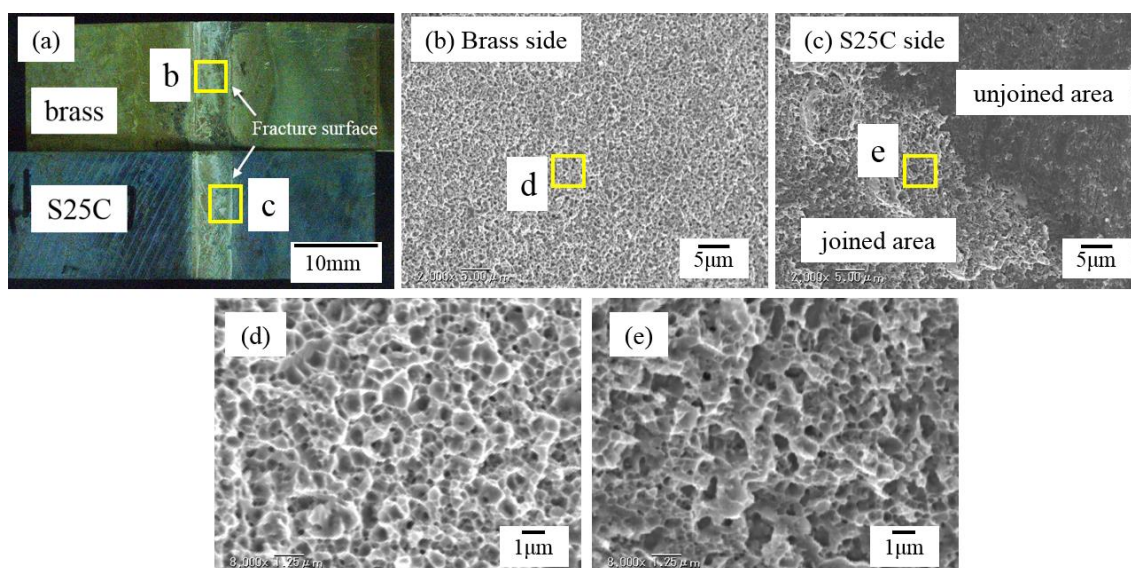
Matching fracture surfaces of the tensile test specimen of 64Brass /S25C lap joint welded with 400 mm/min and 1000 rpm.
